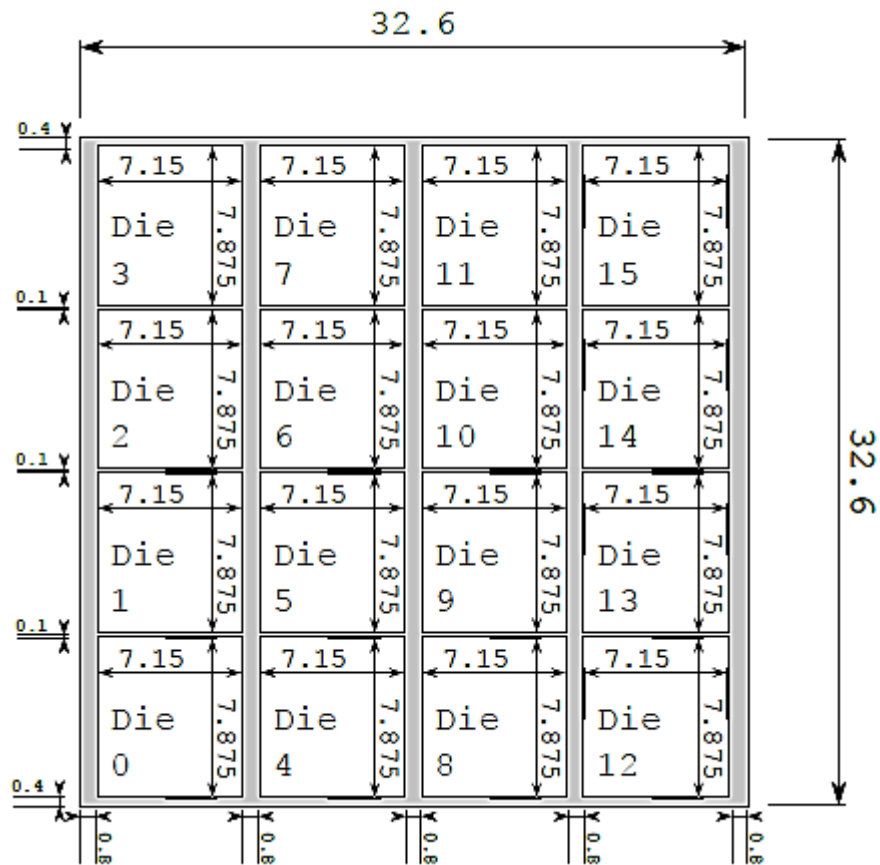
DPC3200-22-44 tile dimension in mm (front view) [43]
